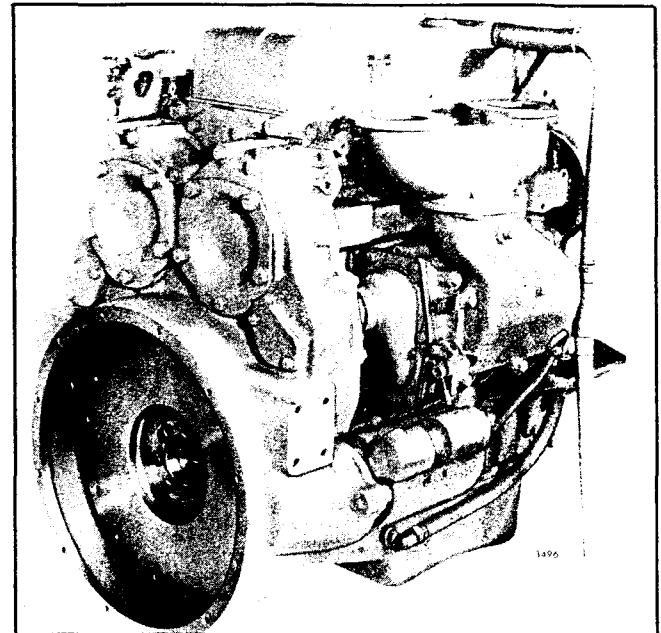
Typical Crankcase Breather Mounting (In-Line Engine)
